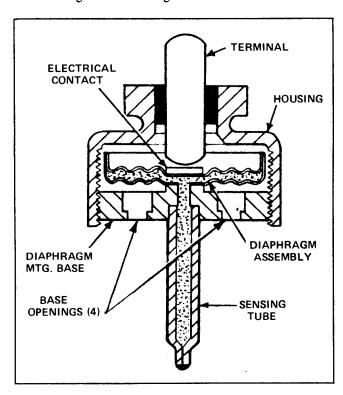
A-29 Cross Section - Superheat Shut-Off Switch
